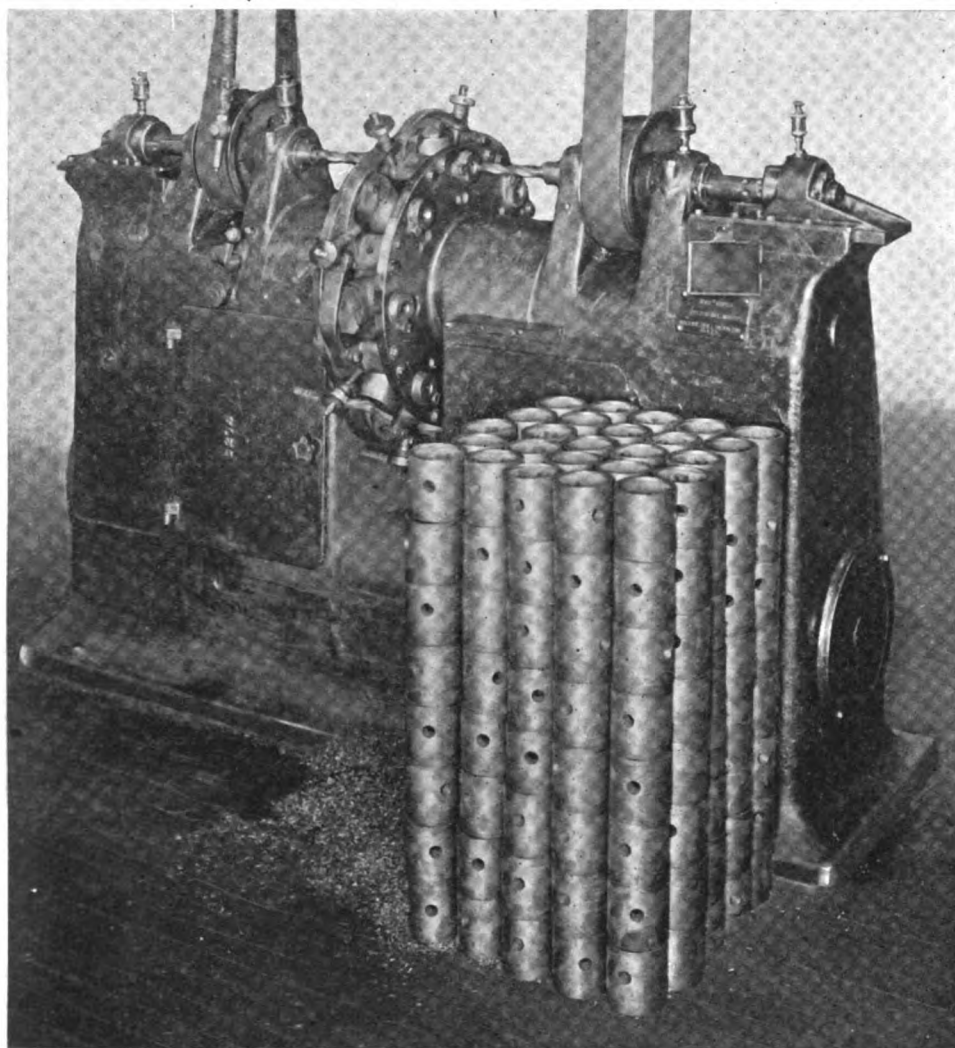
Machine which drills the holes in the piston for the piston pin. These holes are drilled from each side. Machine takes eight pistons at one time
